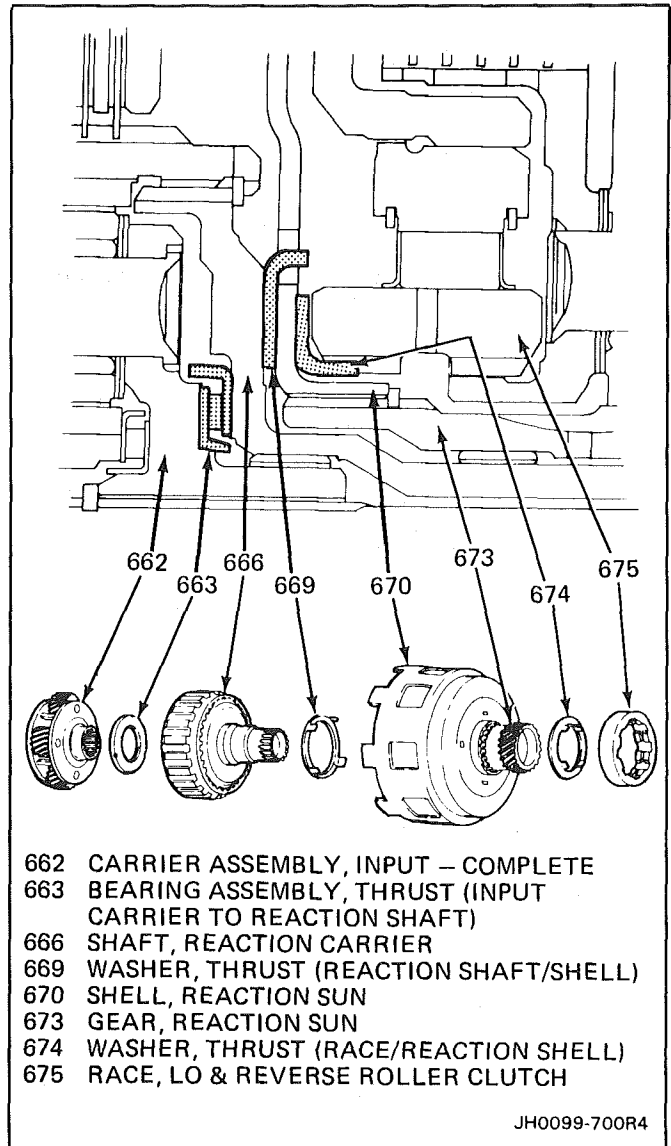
Input Carrier and Reaction Shell Bearing and Thrust Washer Locations
